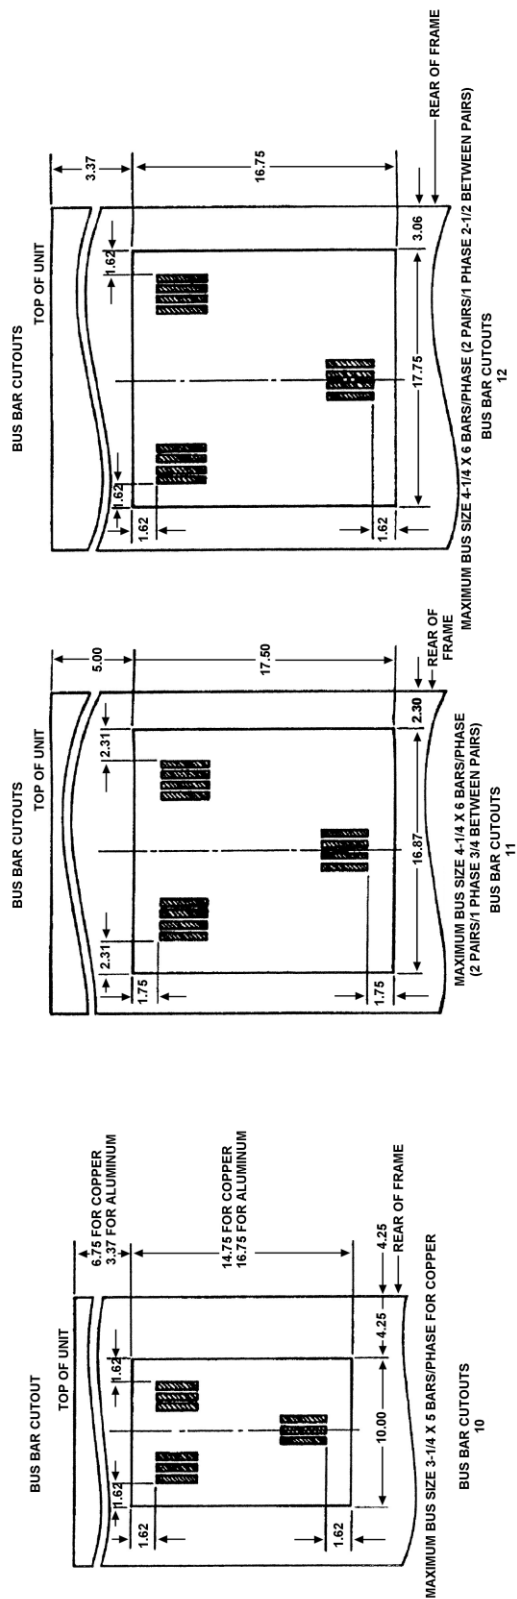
Standardized switchboard plans (sheet 2 of 2) - Continued.
